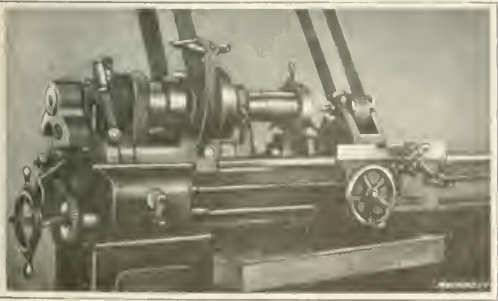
Engine Lathe equipped with Special Fixture for performing Thread Milling Operation on Shells
